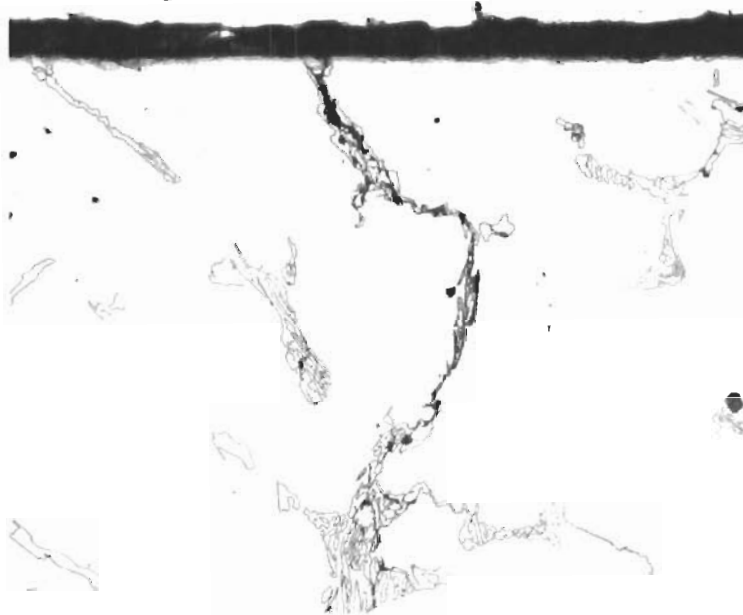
Supercharger Rotor After Run-In. Compare with Figure 12 to Note How the Original Grinding Cracks Extended
